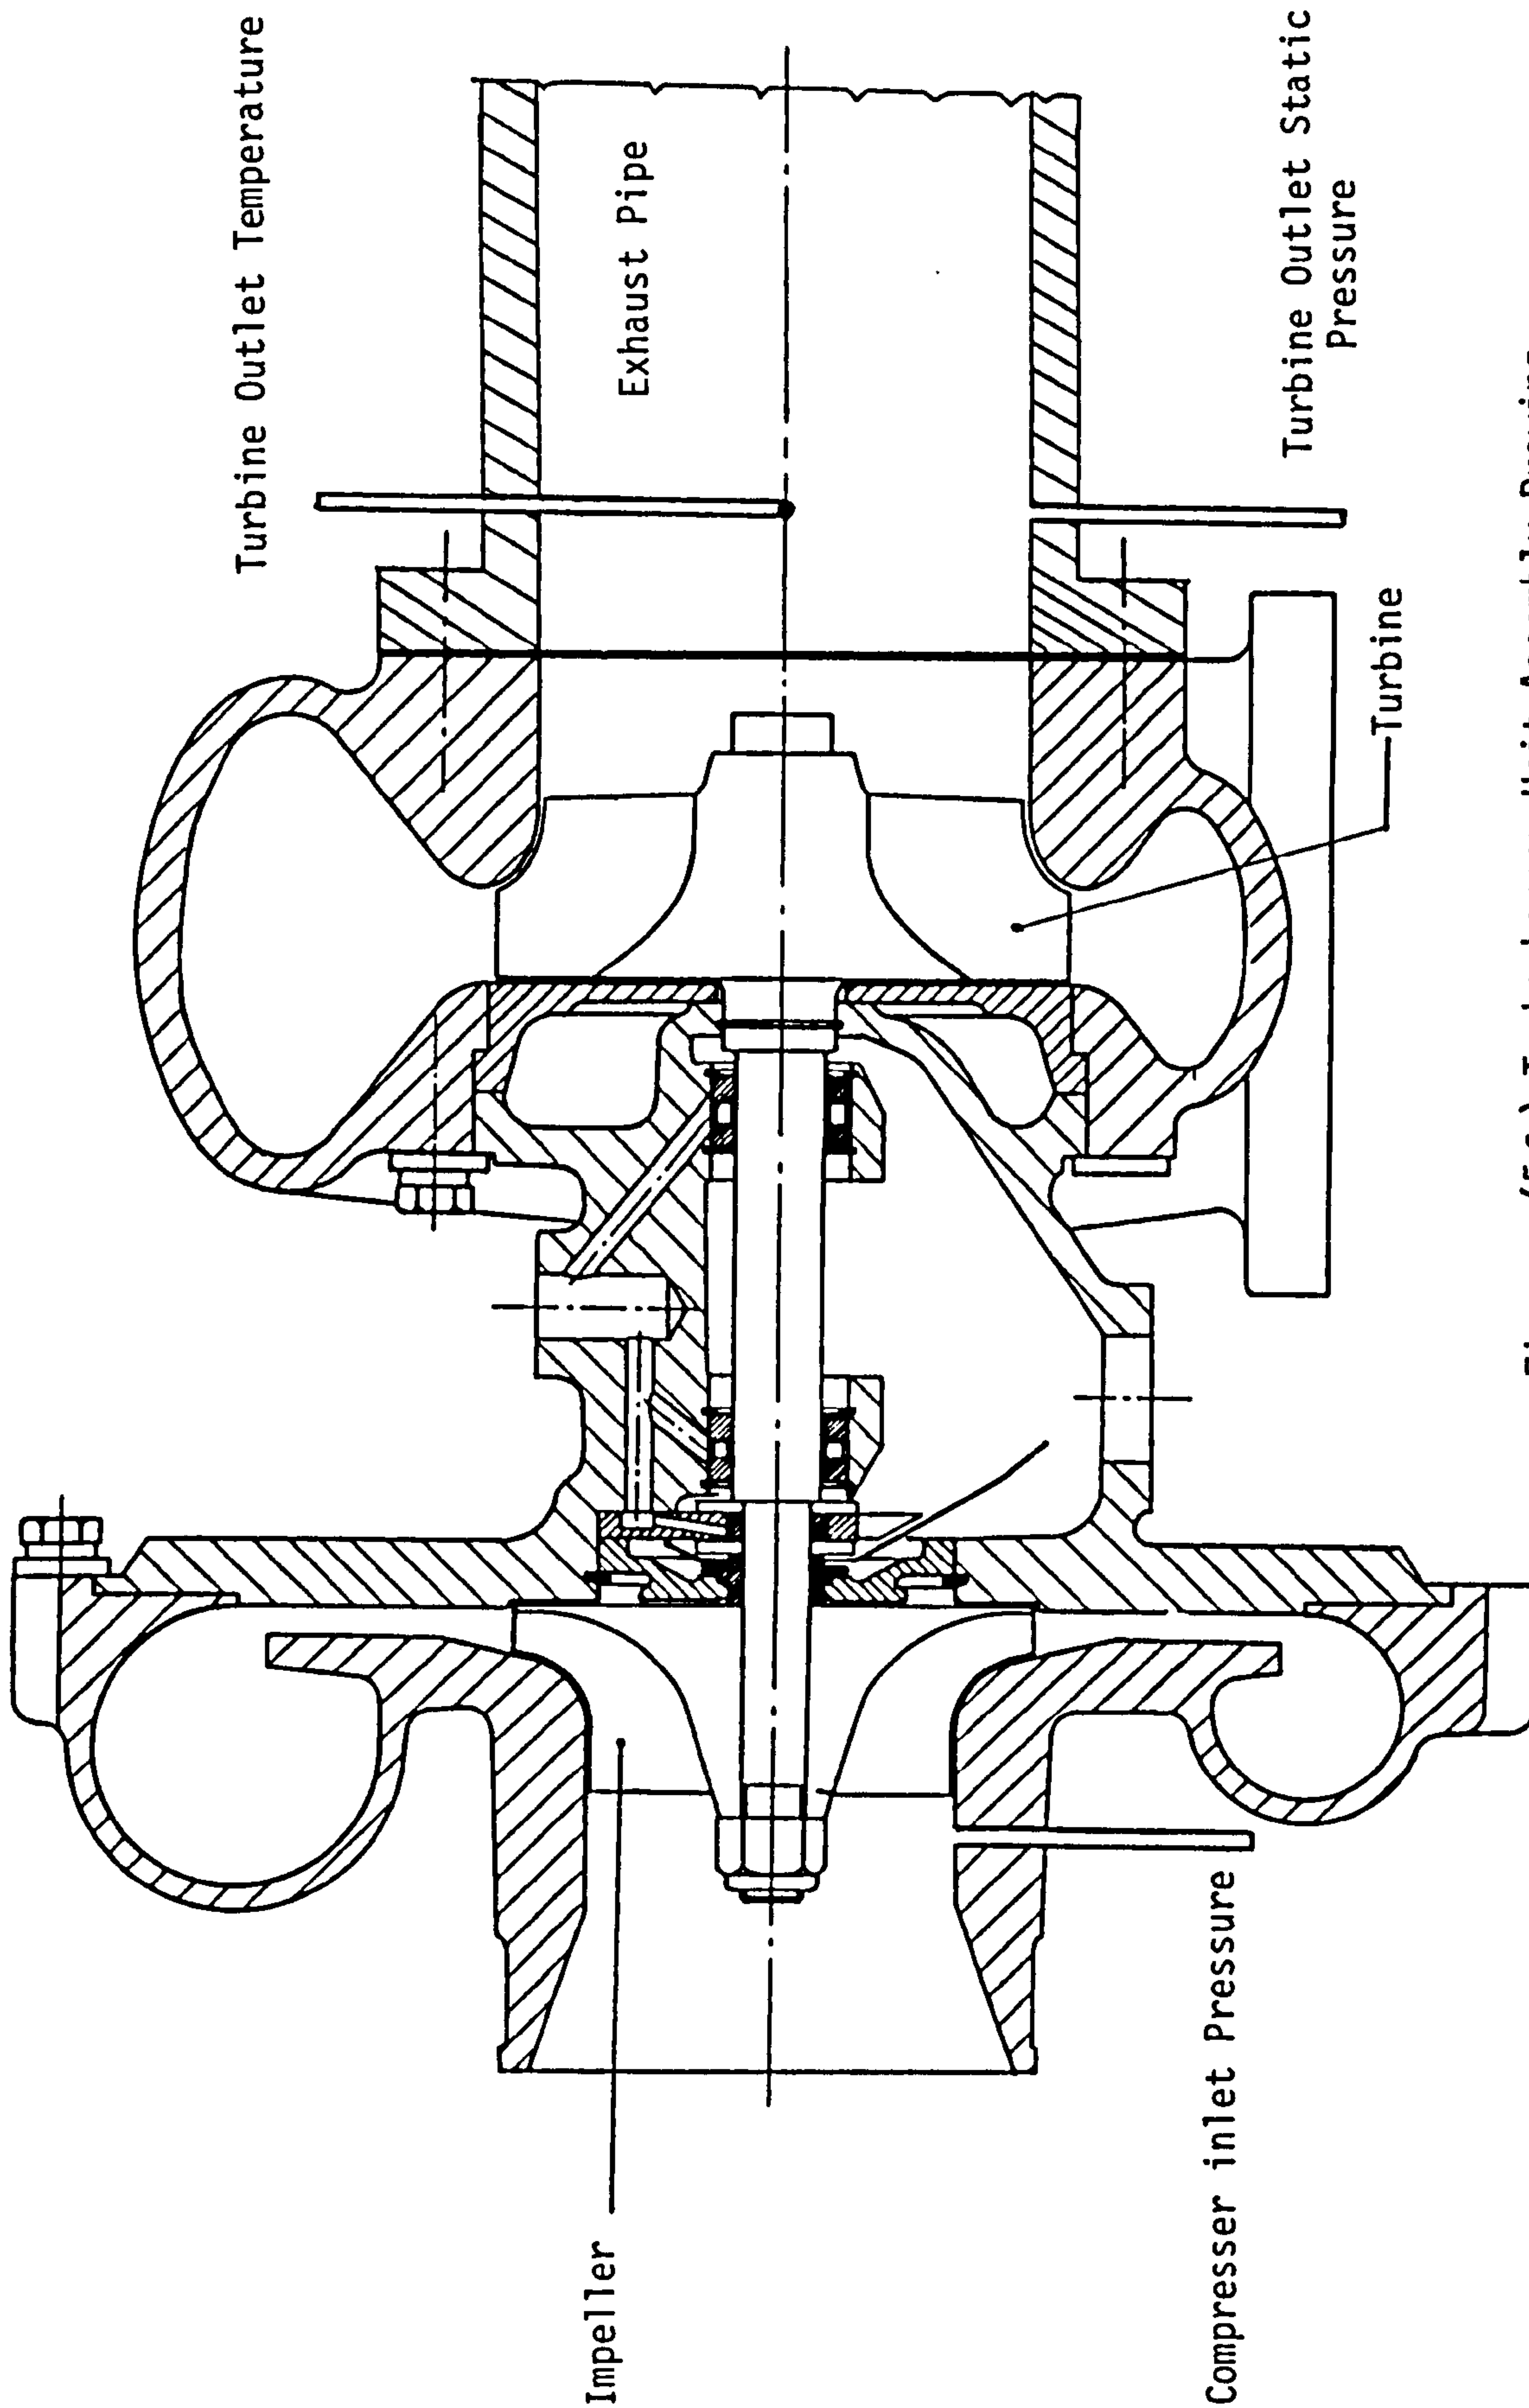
Turbocharger Unit Assembly Drawing
